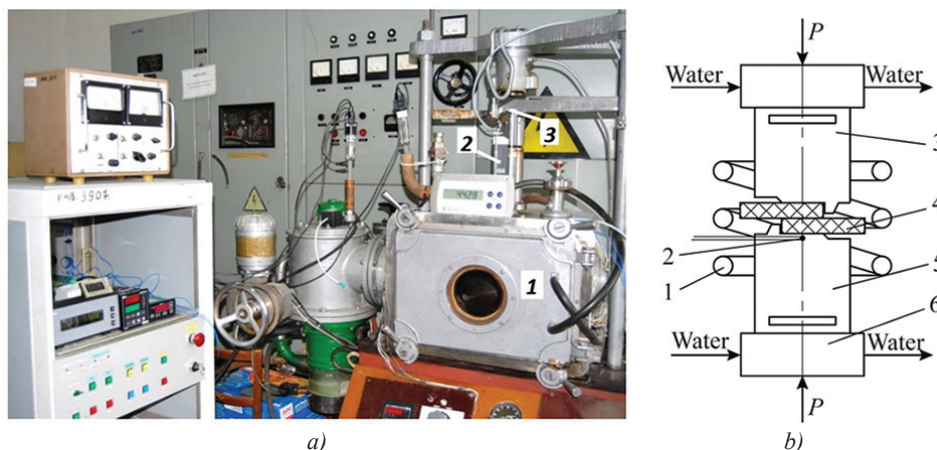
General view of the UDSV-DT installation for DWV (a) and the scheme of sample assembly in the working chamber (b):
